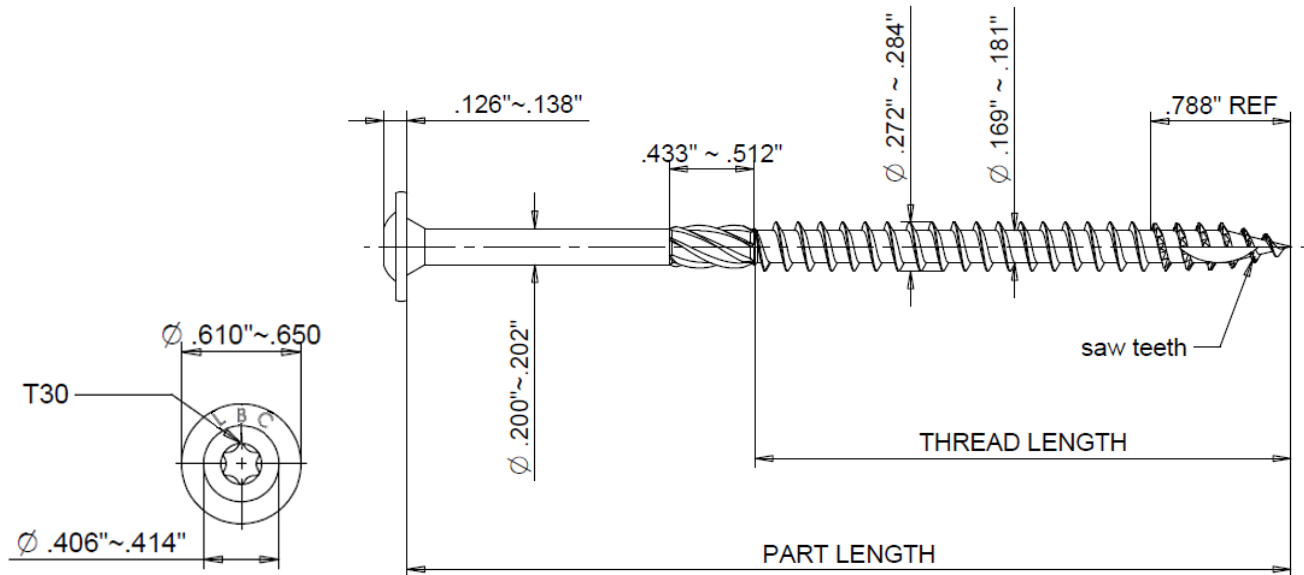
FRAMEGRIP WAFER HEAD TORX 30 WOOD SCREWS
